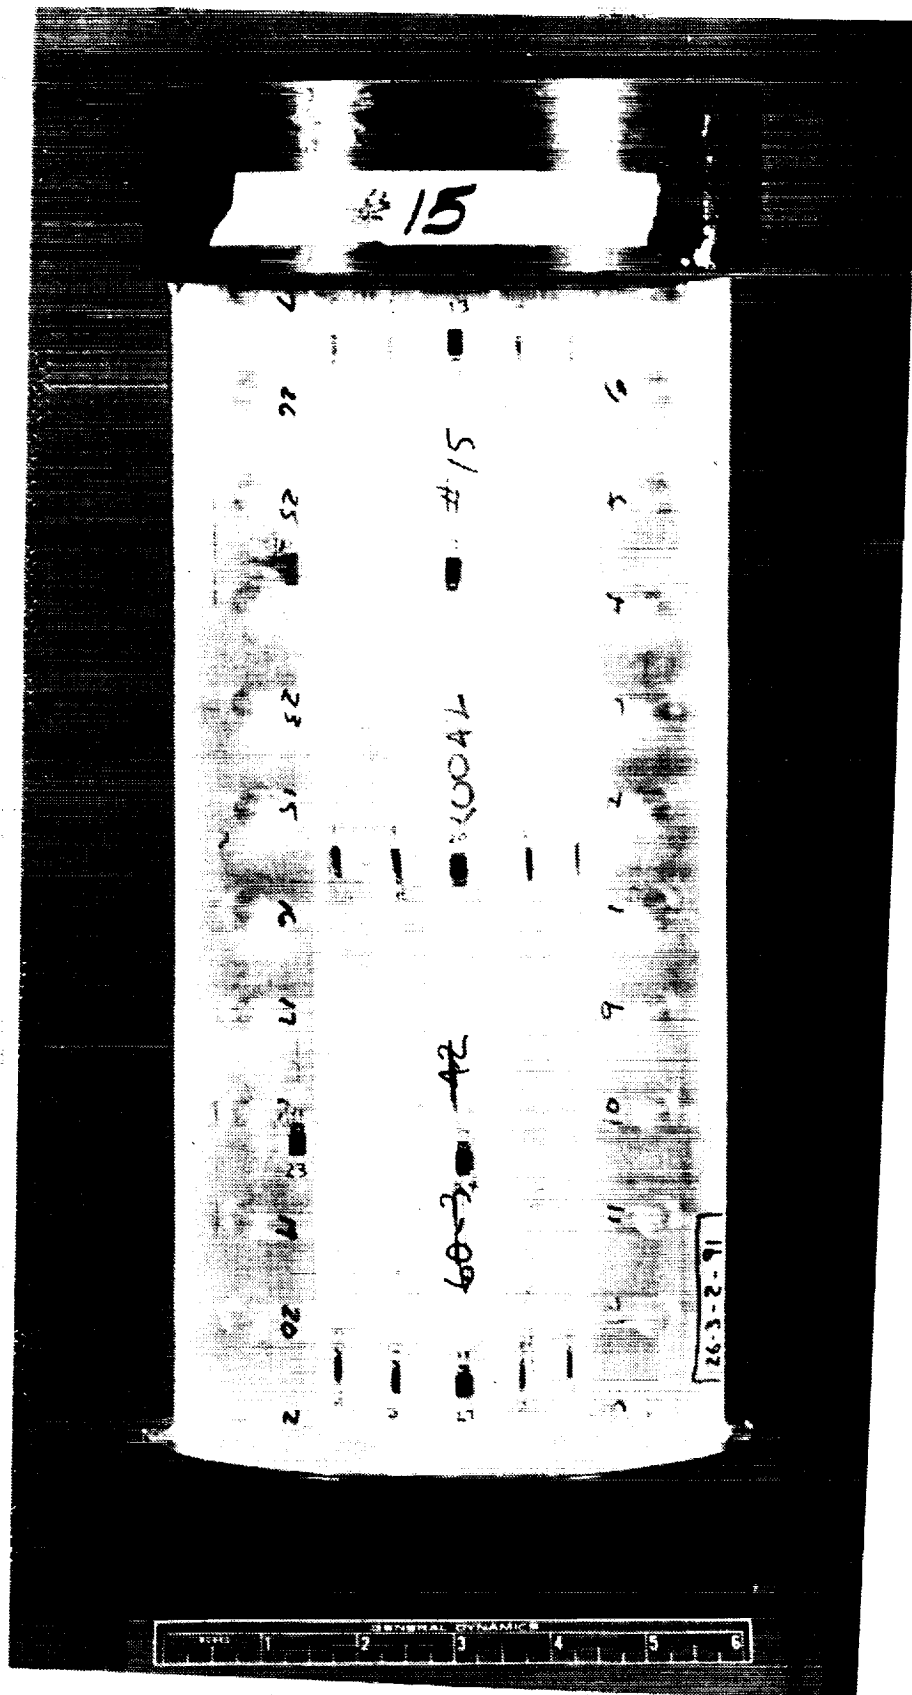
Typical Failure of Stepped Hat Stiffener.
